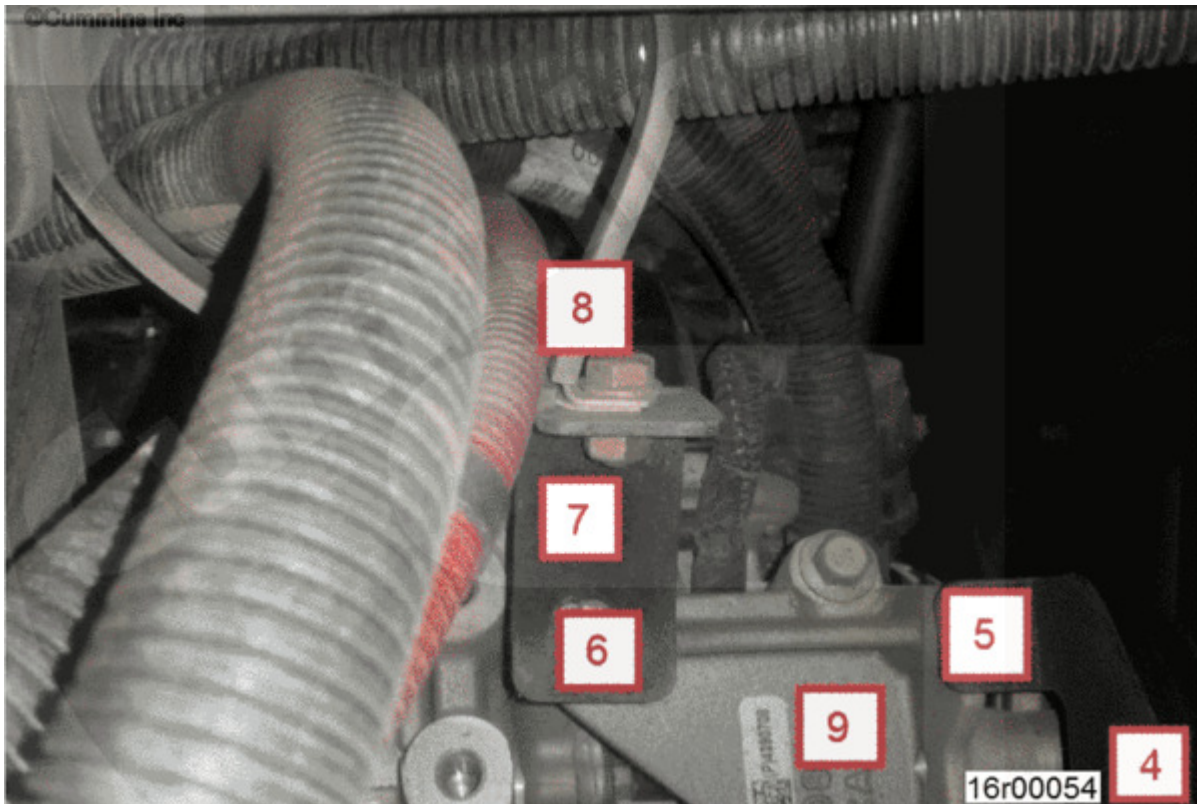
, Lower Accessory Drive Mounting with L-Bracket and P-Clamp.
